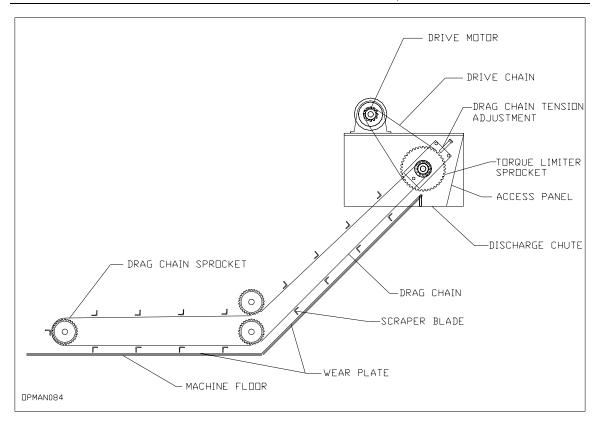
40: Sludge Scraper -- Diagram of Parts
